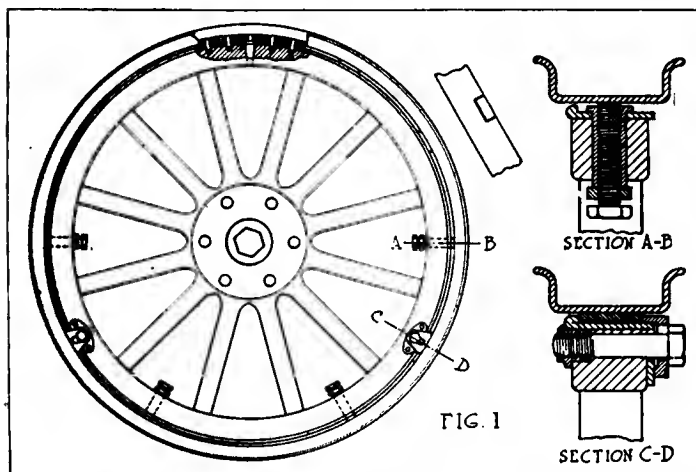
Elements of Parker patent on demountable rim construction. Fig. 2—Improved design of the Parker steel wheel recently patented
